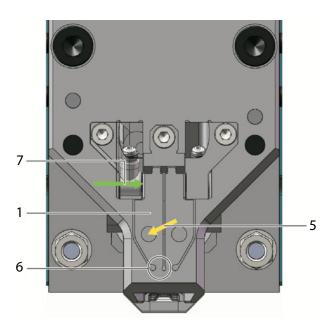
Front view of the crimping cut-off head with force transmission levers
